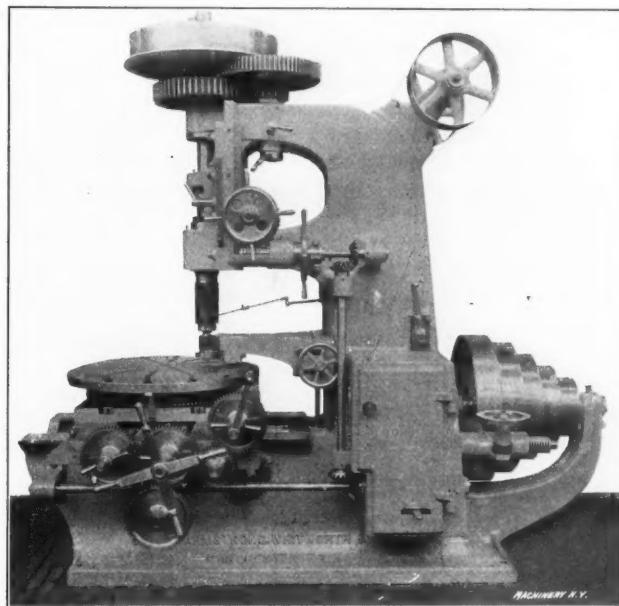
Belt-driven Profiling and Vertical Milling Machine
